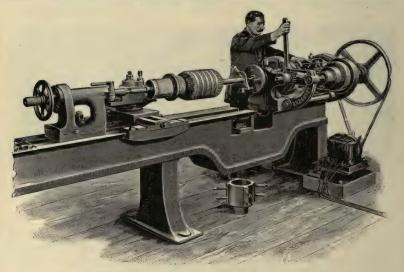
Machinist's Lathe arranged to be driven by Electric Motor.
